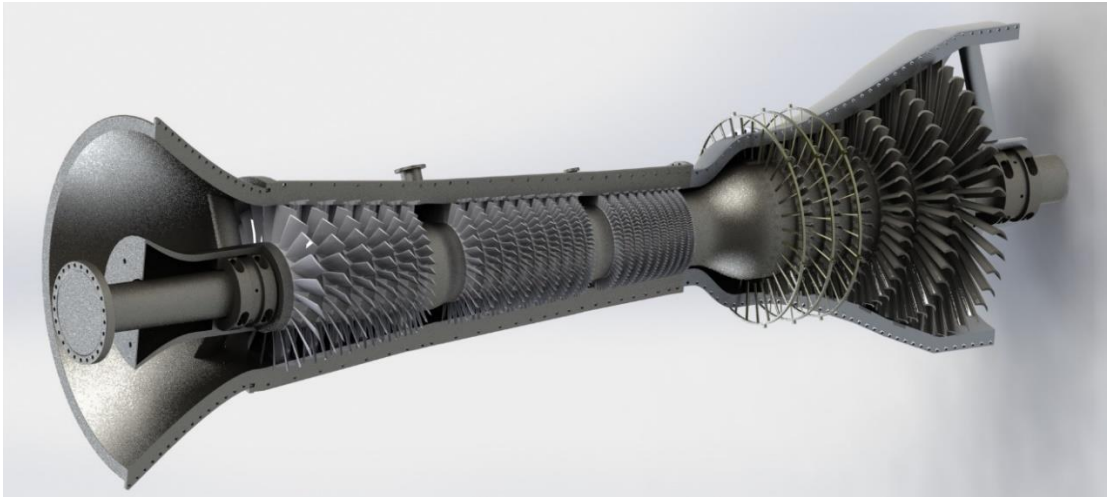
Section view (front side) of Ultra High Efficiency Gas Turbine (UHEGT)
